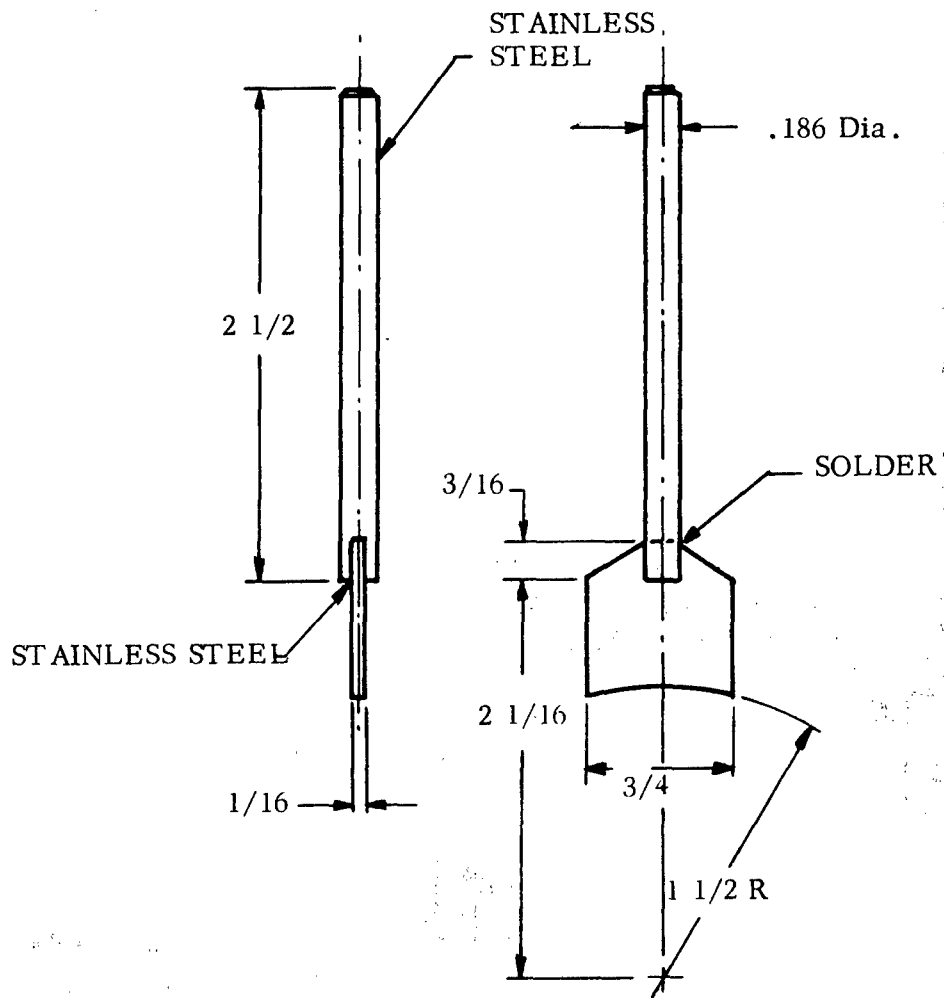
C. PLAN AND ELEVATION VIEW OF BITE BAR BLADE
